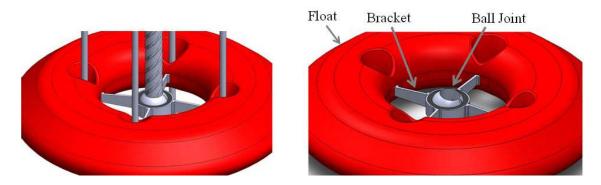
Float and ball joint mechanism assembly. The figure on the left shows the float assembly integrated with the rest of the components. The figure on the right shows the rotational freedom of the ball joint.
